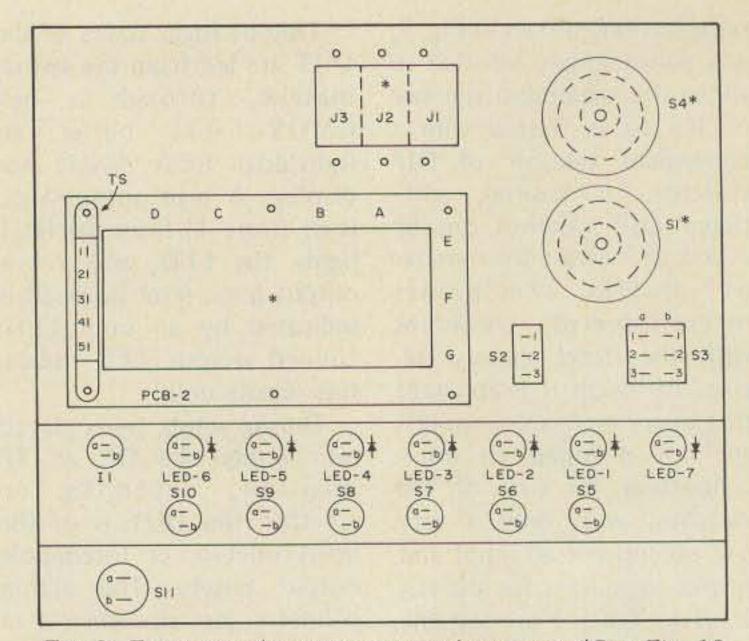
Front panel interior parts placement. *See Fig. 10.
